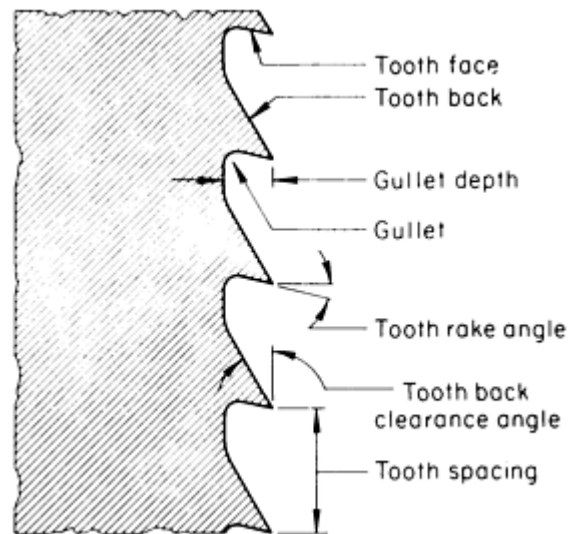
SCHEMATIC SHOWING THE KEY ELEMENTS OF A BAND SAW BLADE CUTTING EDGE
